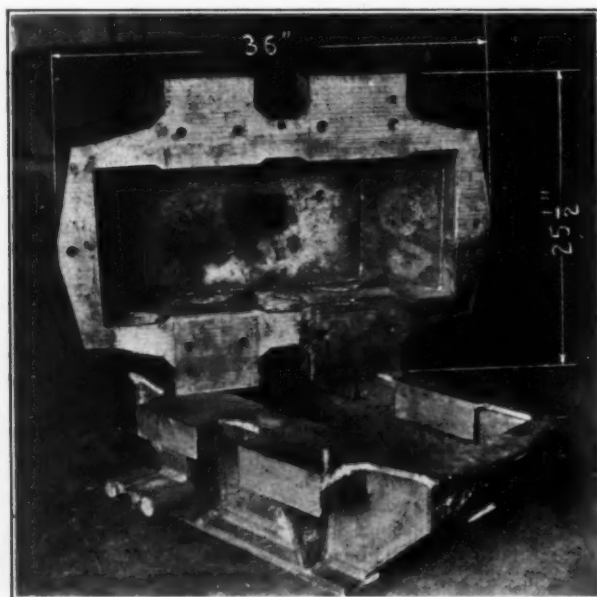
METAL-ARC-WELDED GEAR CASING
